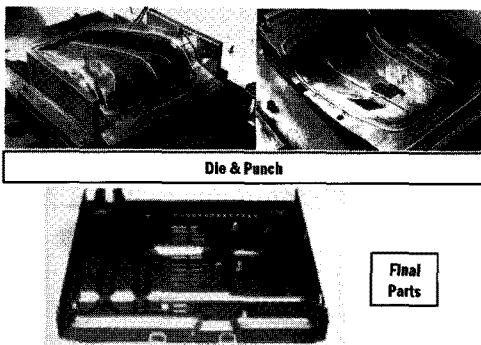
Applications of steel lamination process to manufacturing of sheet metal forming tools (Univ. of Tokyo and Hanai Engineering Inc., Japan)³⁰
